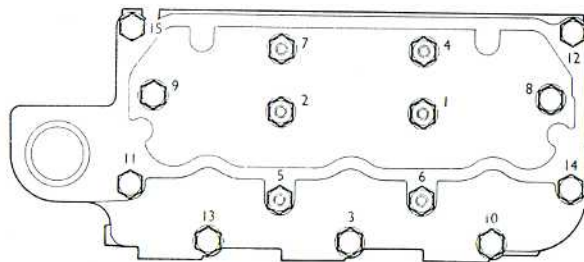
/10. CYLINDER HEAD TIGHTENING SEQUENCE
